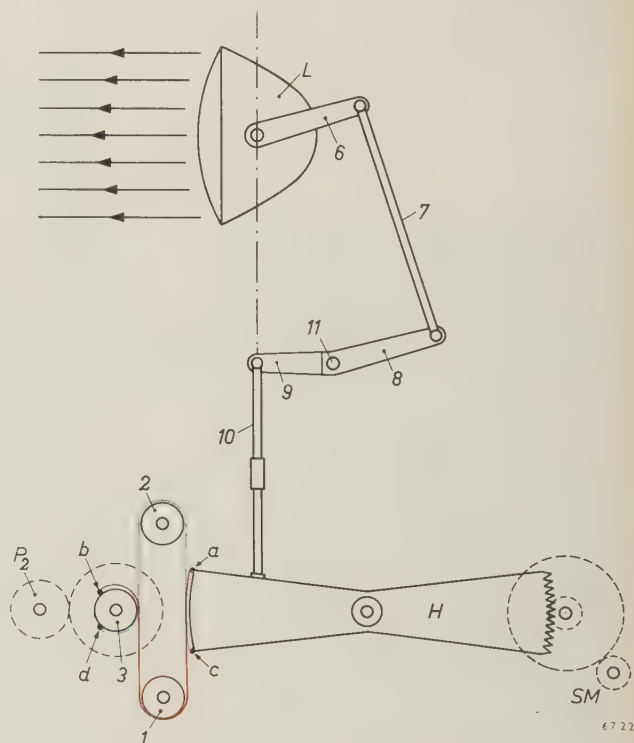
Illustrating the method of transmitting the shaft rotation of the elevation servo-motor SM to the lamp. L lamp. 6, 8 and 9 levers. 7 and 10 rods. 11 spindle on which 8 and 9 are mounted (cf. fig. 12). The rod 10 consists of two parts which, for the azimuthal movement, can rotate relative to each other about the common axis. H lever, having a toothed sector on the right and a plain sector on the left. The movement of H is transmitted to positional potentiometers  $P_2$  by two metal bands. One band (red) runs from point a, where it is fixed to the sector, over roller 1 to point b on drum 3. The other (blue) runs from c over 2 to d. The spindle of 3 is fitted with a gear wheel which, via a second gear, rotates the shaft of potentiometer  $P_2$ .
